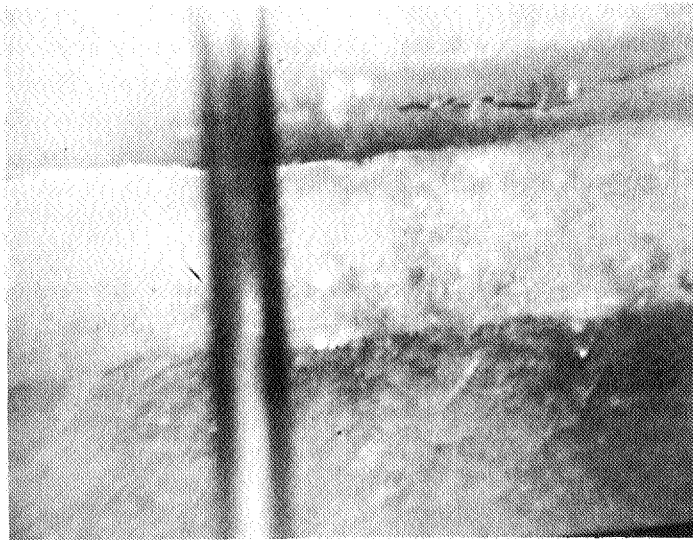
Crack in weld of ammonia reformer catalyst tube.
